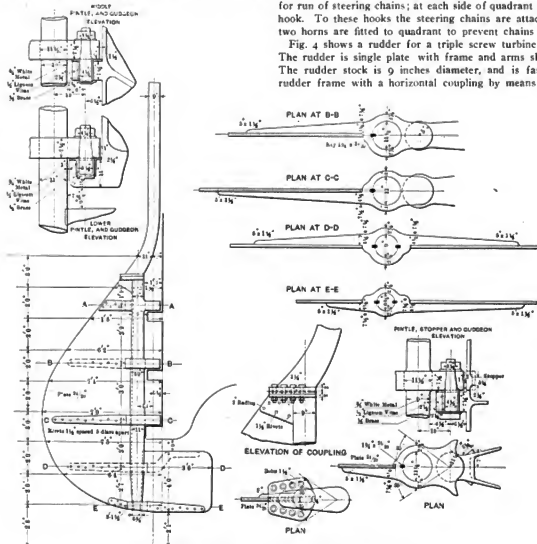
RUDDER AND DETAILS FOR A TRIPLE-SCREW TURBINE STEAMER.
